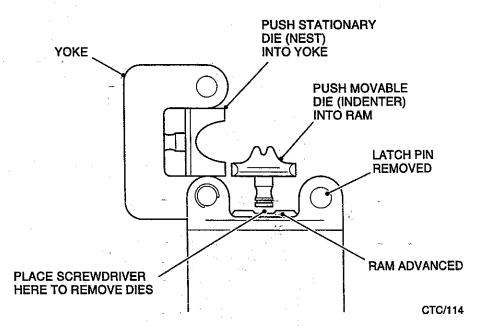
Inserting dies in the head of the hydraulic foot-operated tool
